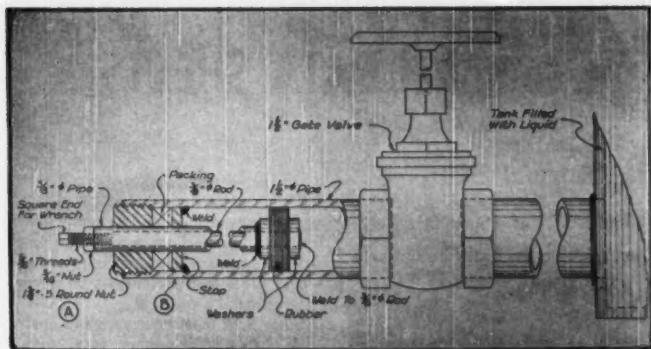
Detail of stuffing box and plug assembly for sealing off pipe between valve and tank.
